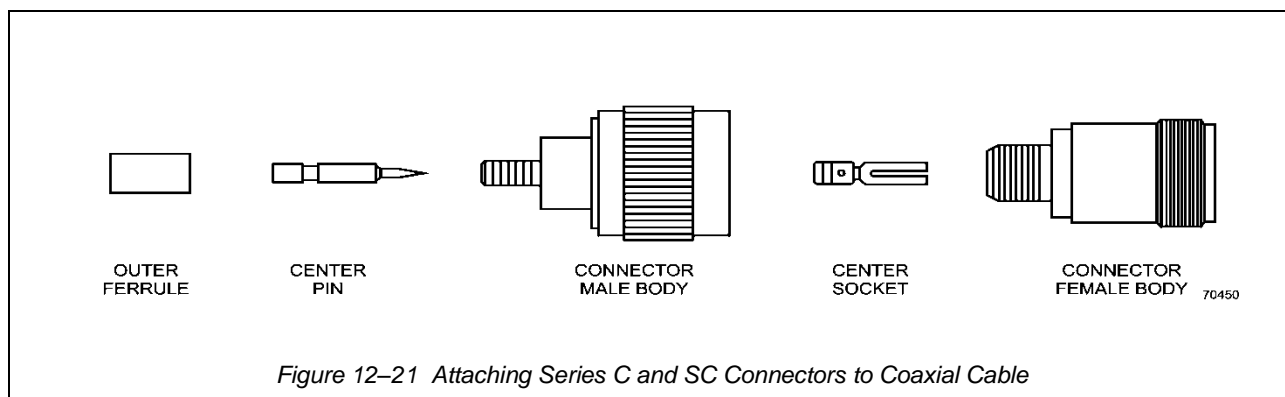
Attaching Series C and SC Connectors to Coaxial Cable
